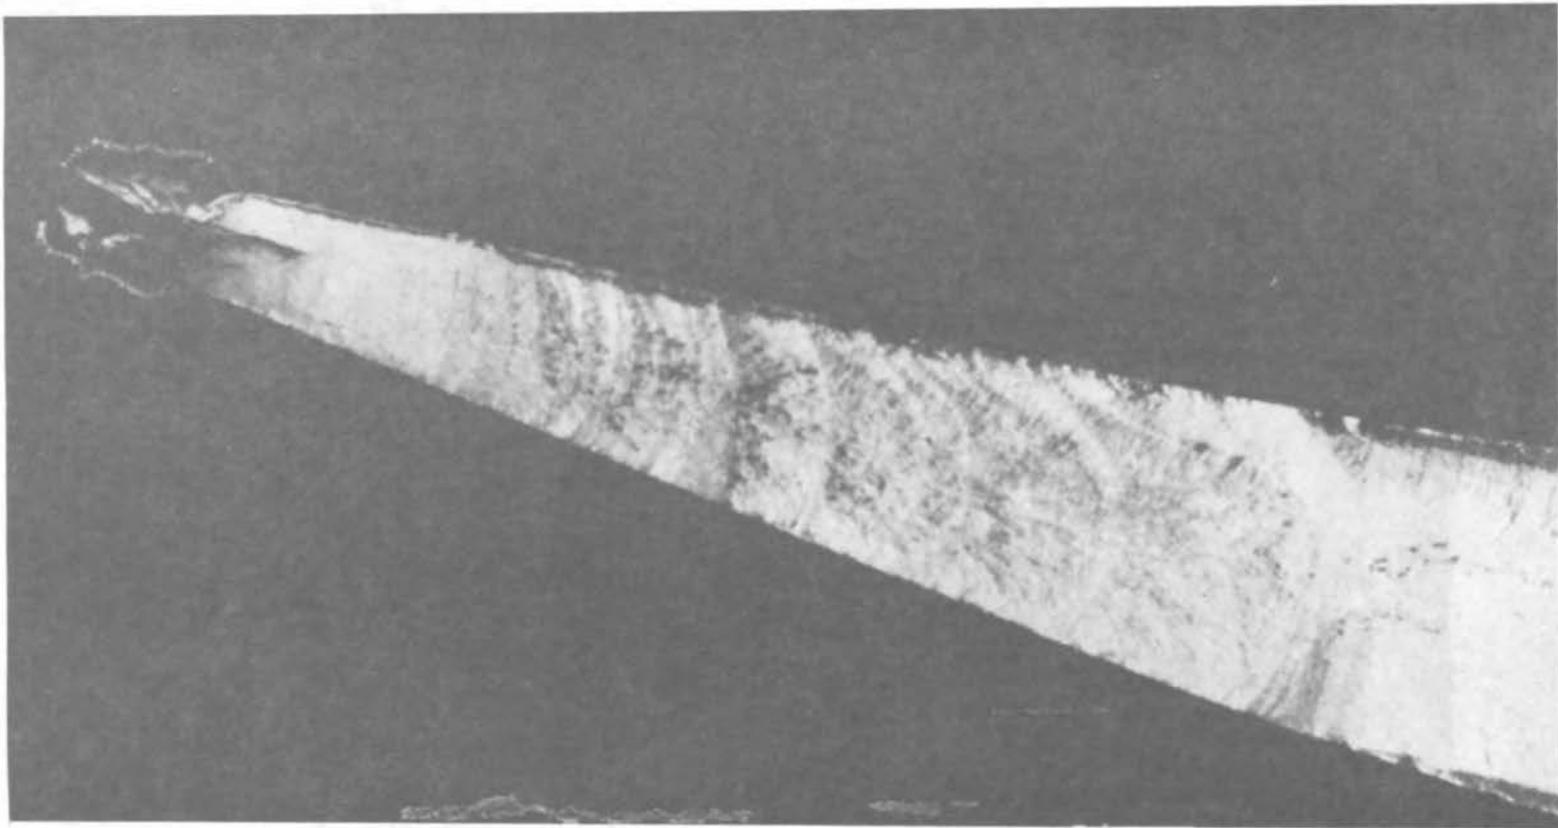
Shear band defect caused by die chilling leading to a fatigue failure
